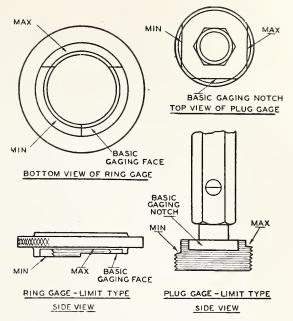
Limit type of taper pipe thread plug and ring gages.
